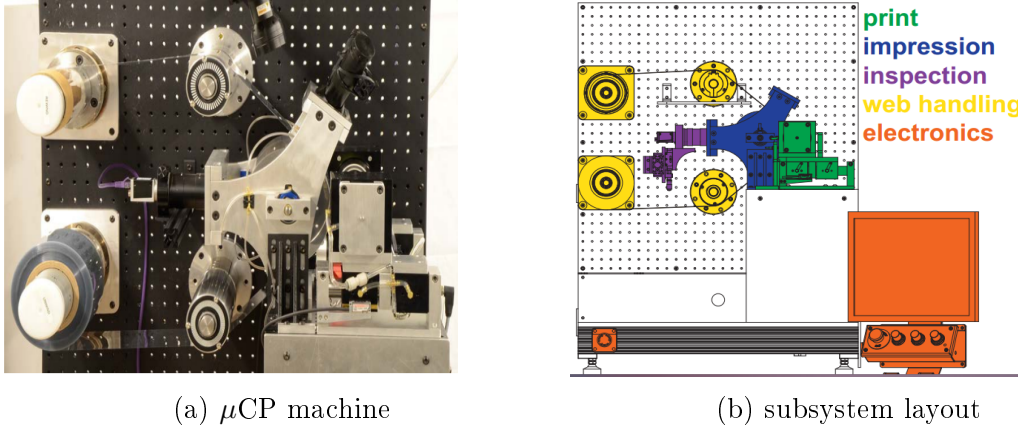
Roll-to-roll micro-contact printing (μ CP) machine.
